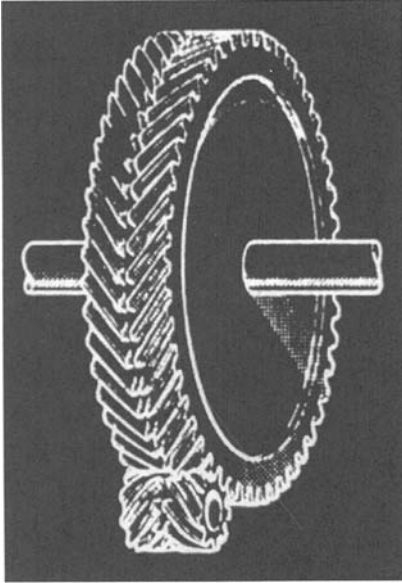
Herringbone gears (double helical). (Courtesy of Lubrizol Corp.)
